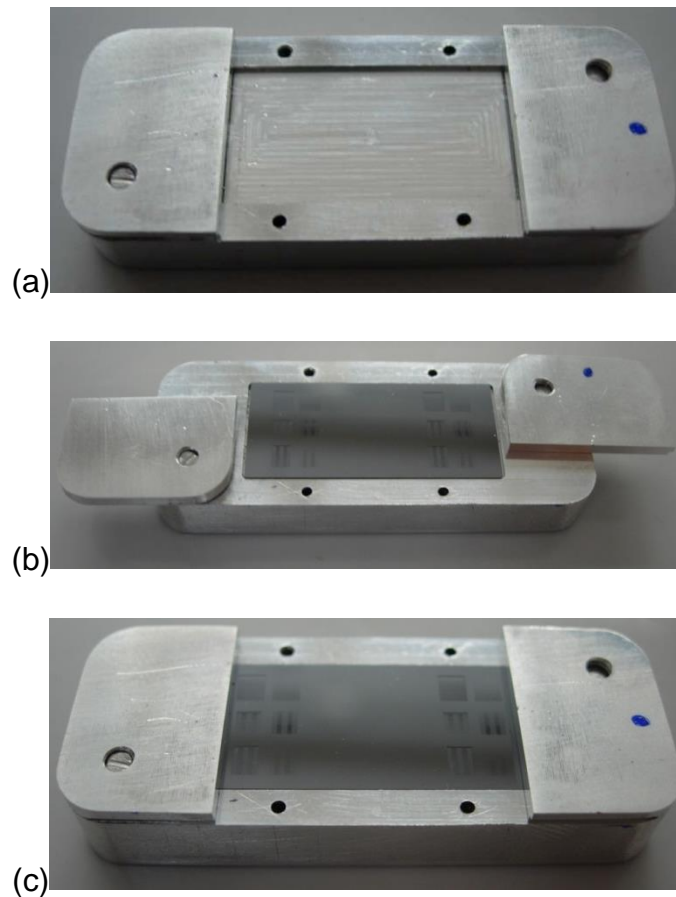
(a) pre-made mould, (b) open aluminium parts to allow insertion of silicon insert, (c) closed aluminium parts to secure silicon insert in mould
